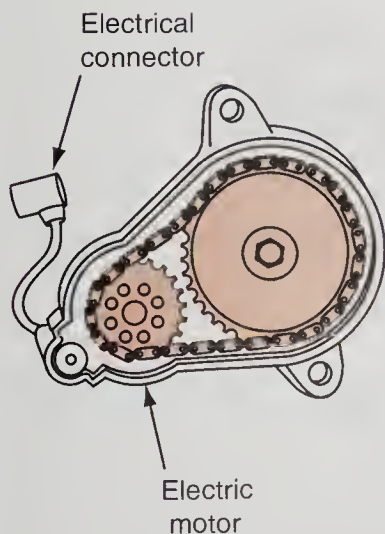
This parking brake is applied by an electric motor and cam operating directly on the caliper.
